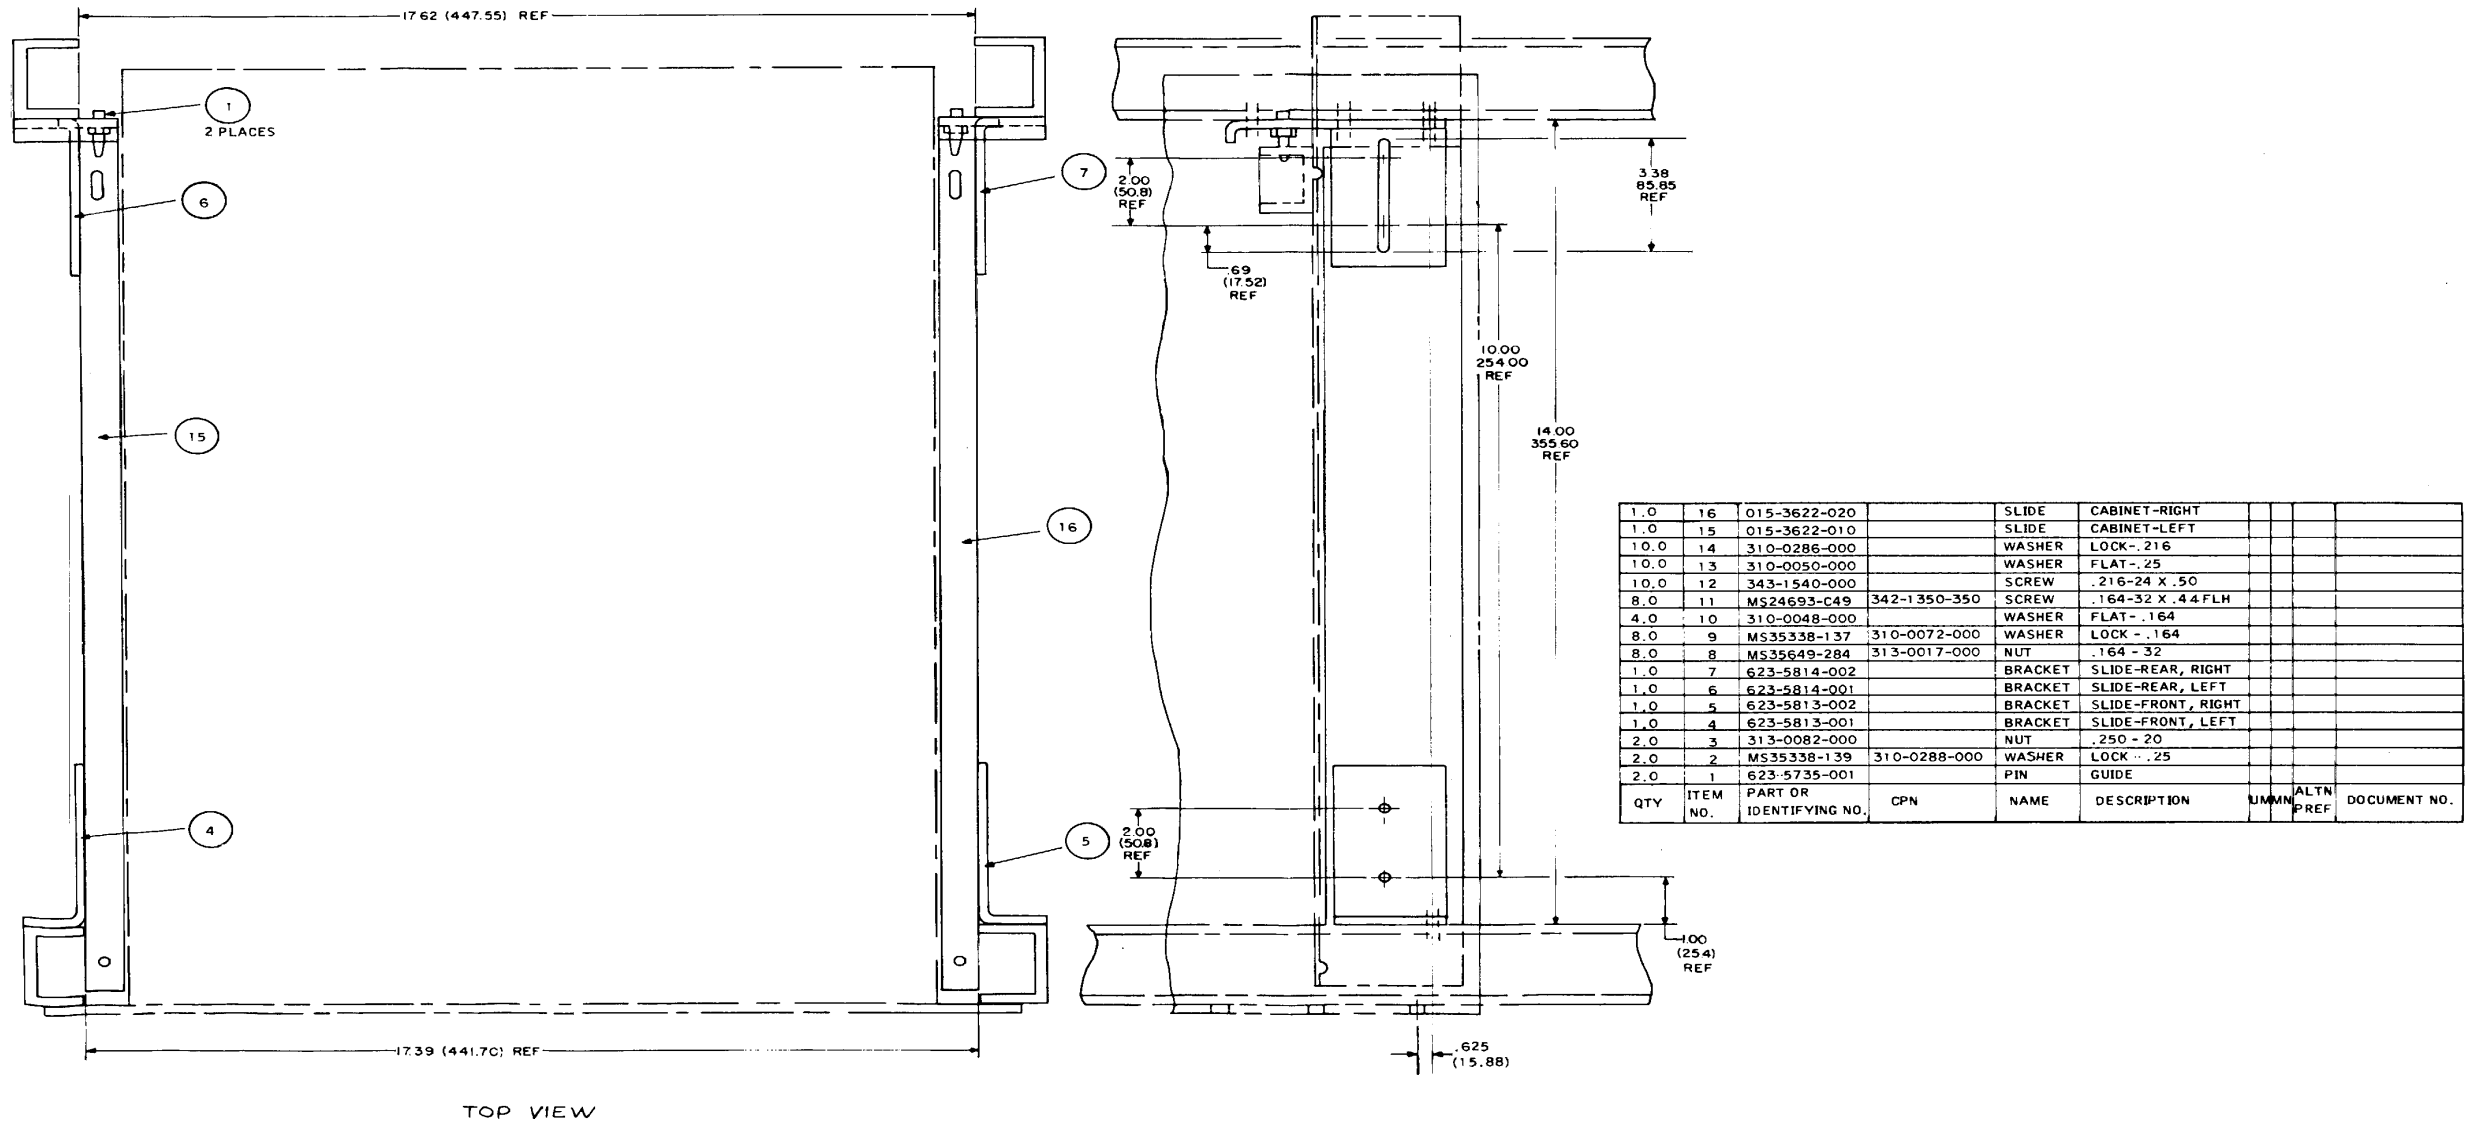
Radio Receiver Transmitter RT-980/GRC-171, Outline and Mounting Dimensions Diagram (Sheet 2 of 2) 6-5/(6-6 blank)
